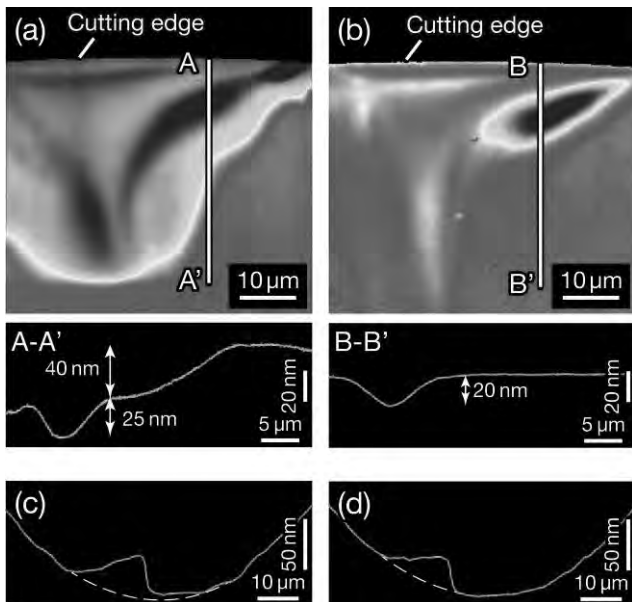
Tool wear on the rake face of (a) the FIB tool and (b) the heat-treated tool. (c) The shape of the cutting edge of the FIB tool and (d) the treated tool. The dashed lines in (c) and (d) indicate the original tool shape.
